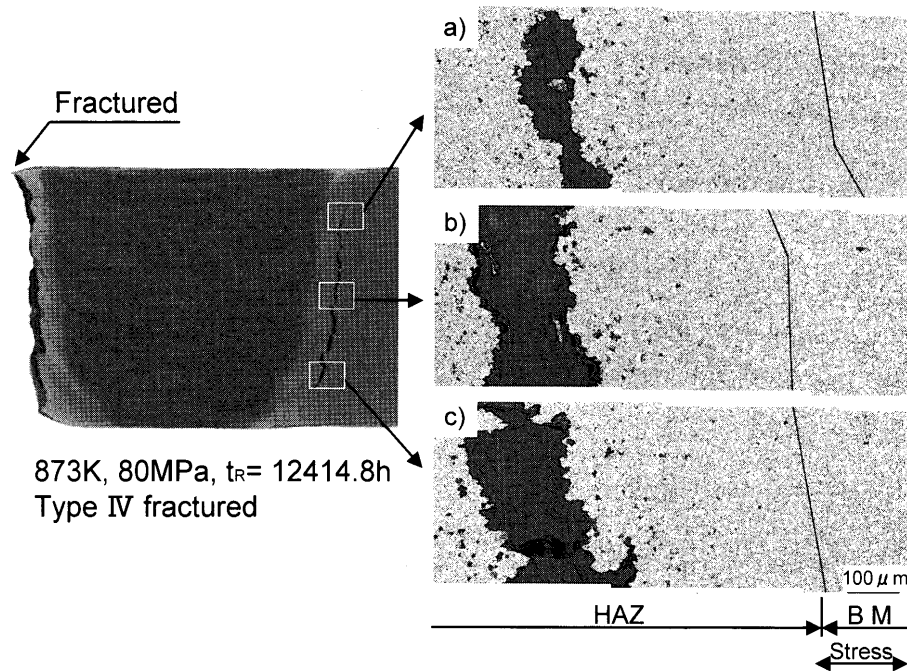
Profile and optical microstructures of the type IV fractured specimen of the welded joint.
